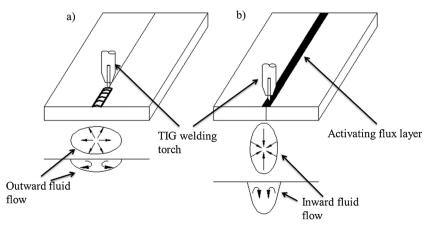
The schematic diagram of fluid flow pattern a) GTAW b) ATIG welding.
